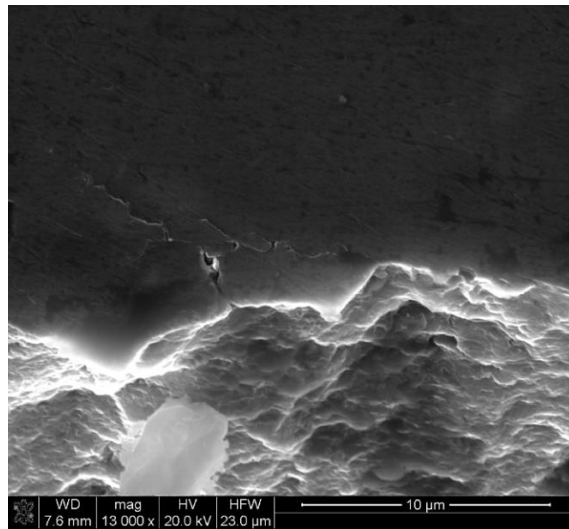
Side cracks in the fracture surface of the FSPed and welded metal at the
